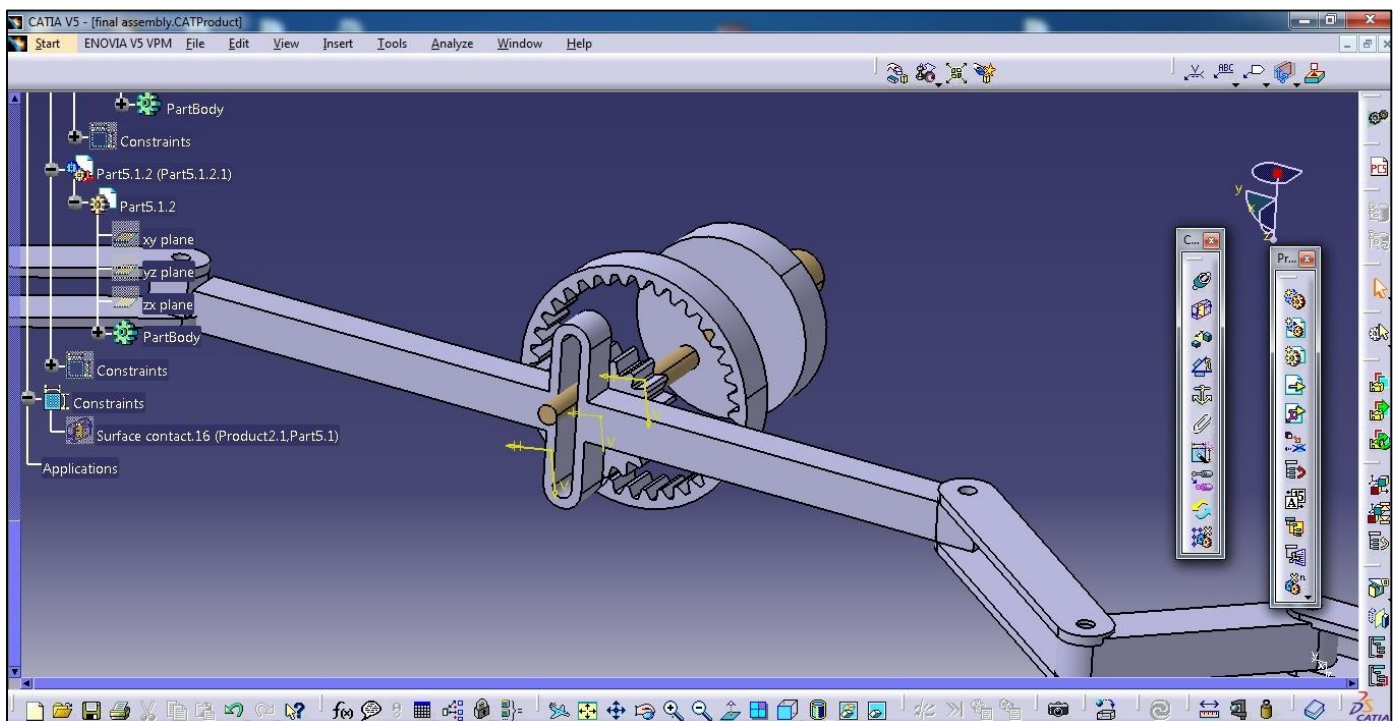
Rear Wheel 3D Catia Model (Rear View)
